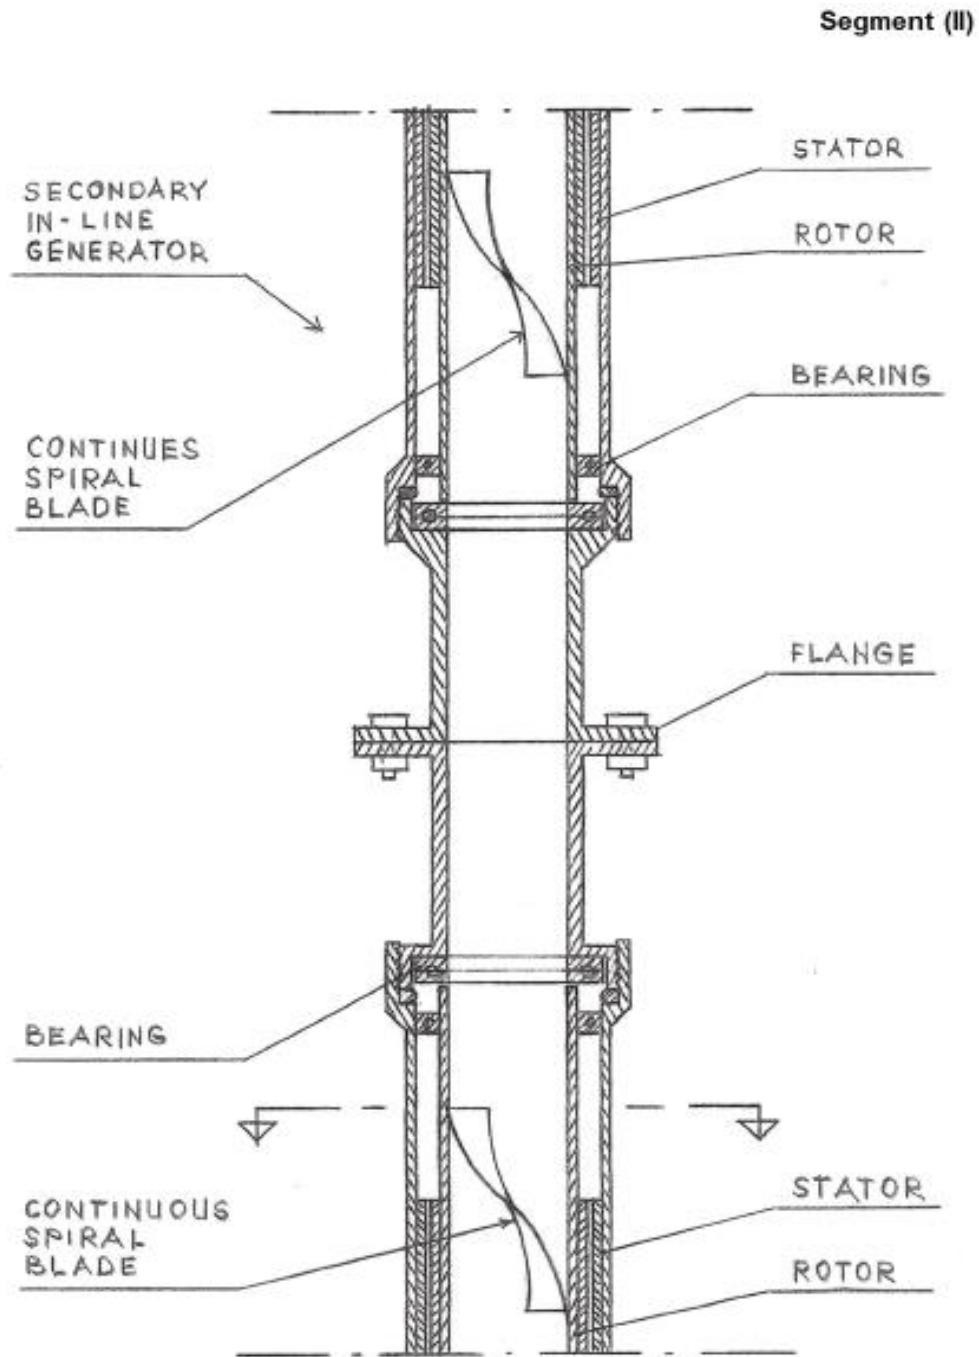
Cross-sectional longitudinal View of the Secondary In-Line-Pump / Generator
